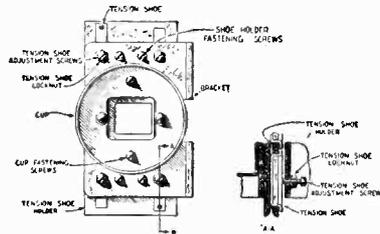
Front section of the picture gate, showing the location of adjustment screws
